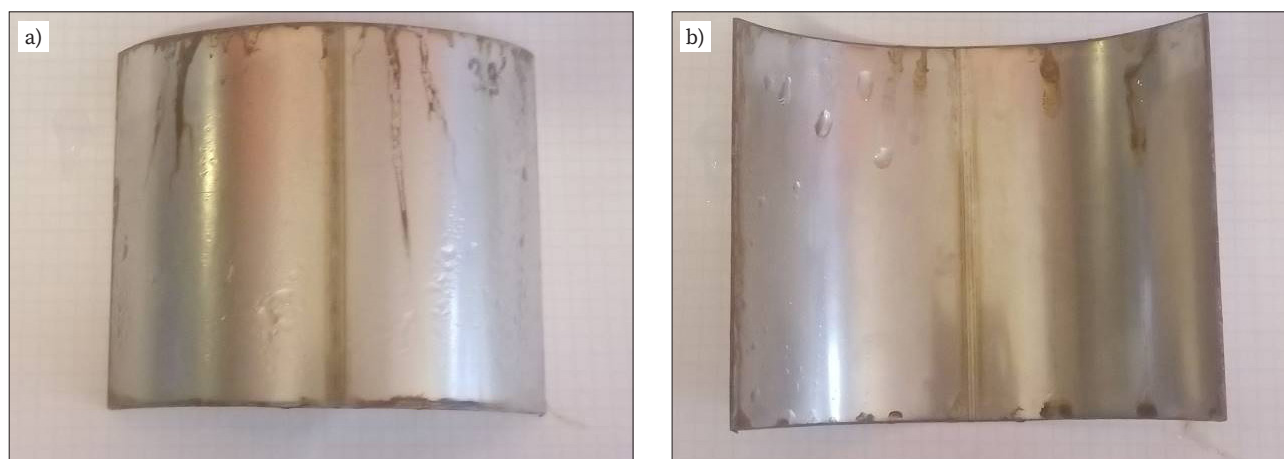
Base material (BM) after 168 hours of the test in the salt spray chamber: a) external surface of the specimen (tube) and b) internal surface of the specimen
